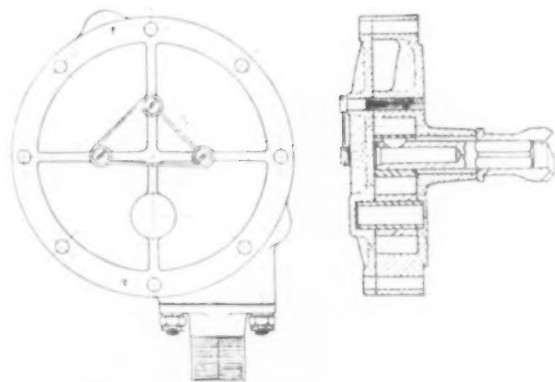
OIL-PRESSURE-PUMP ASSEMBLY
